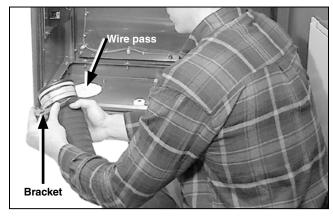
Placing the holding brackets in the grooved channel of the conduit.
